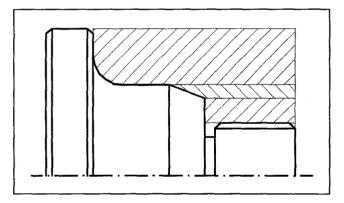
Roughing machining areas for a decreasing shape rotational parts
